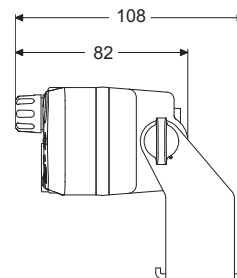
Side View of O7 Control Head with Remote Mount and Trunnion
